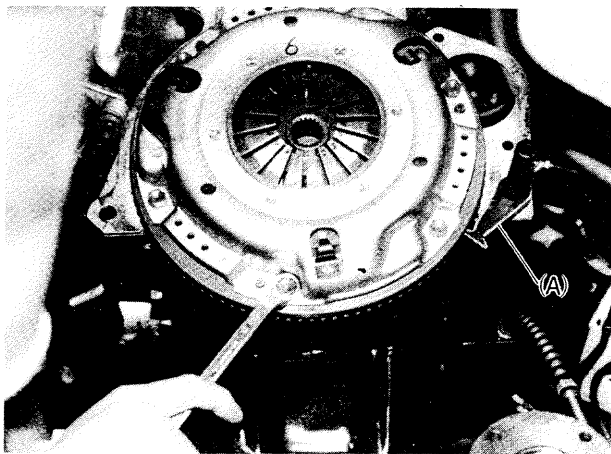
(A) Special tool (Flywheel holder 09924-17810)
